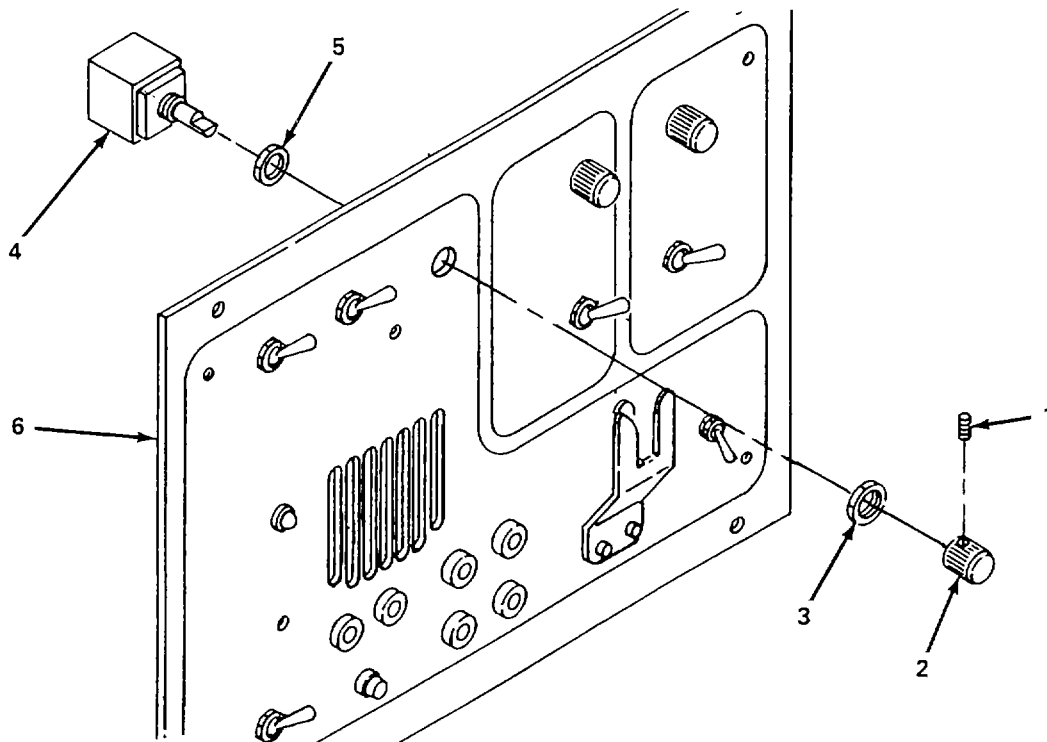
Front Panel Chassis Assembly Potentiometer and Rheostat, Replace.
